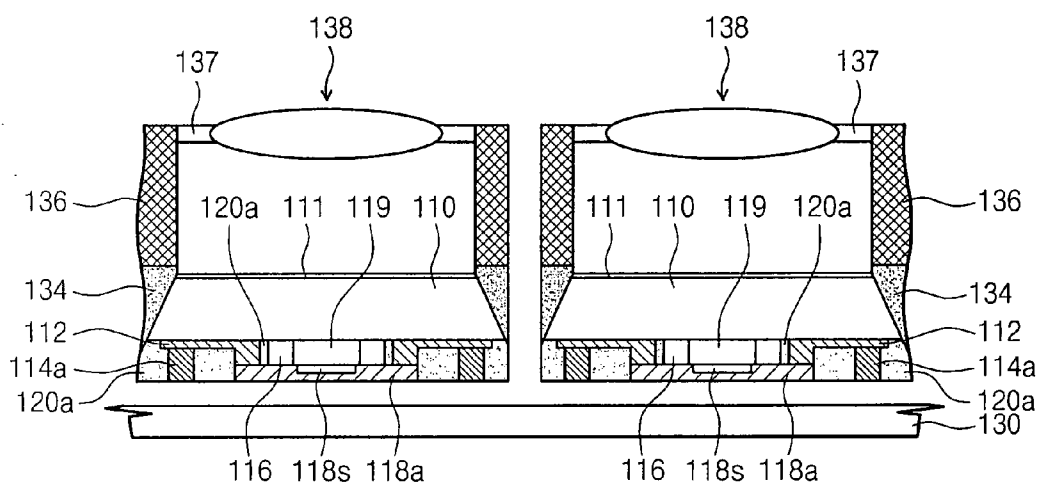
IMAGE SENSOR PACKAGE AND METHOD OF FABRICATING THE SAME
